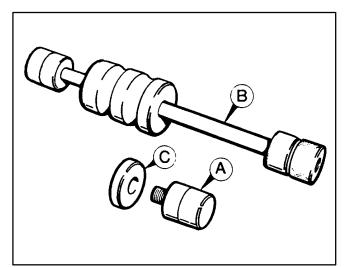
CAMSHAFT BUSHING TOOL
